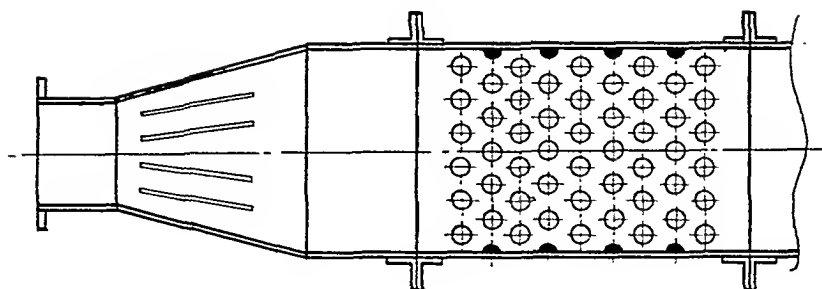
SECTION THROUGH TUBE BUNDLE
